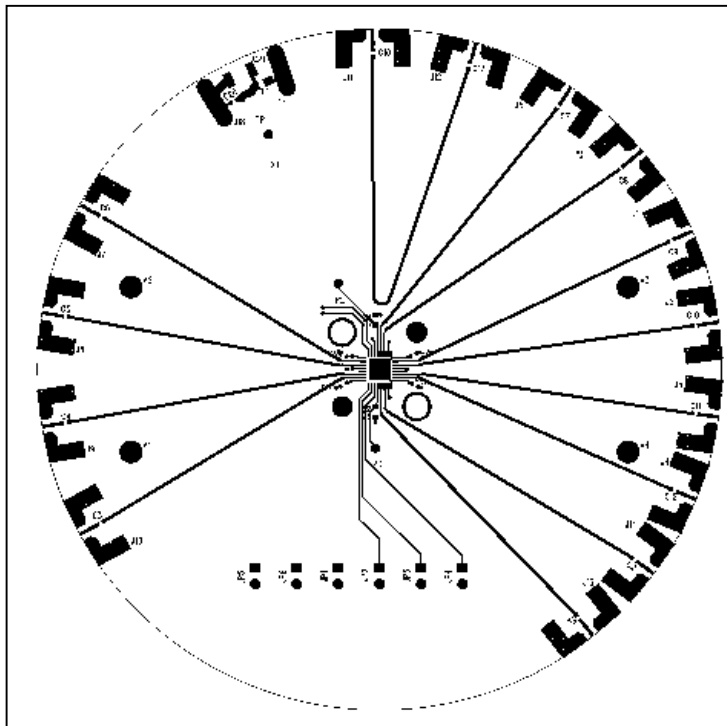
MAX3786 EV Kit PC Board Layout—Component Side
